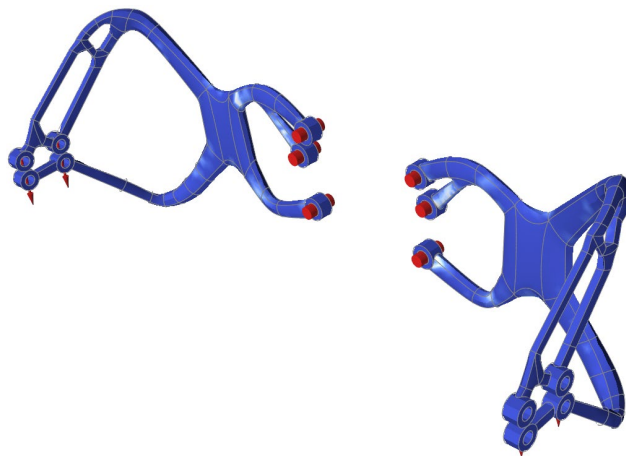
Motor Mount Bracket Topology Optimized Design
